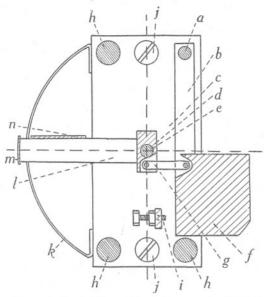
Section of angle metre from side, and just above centre. The circular locking strips have been removed, as well as the outer frame plate and outer half of dial.
